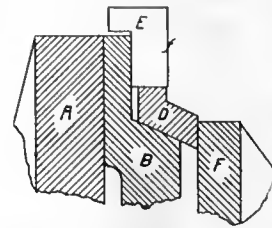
PISTON VALVE RING MACHINING—SECOND OPERATION.
